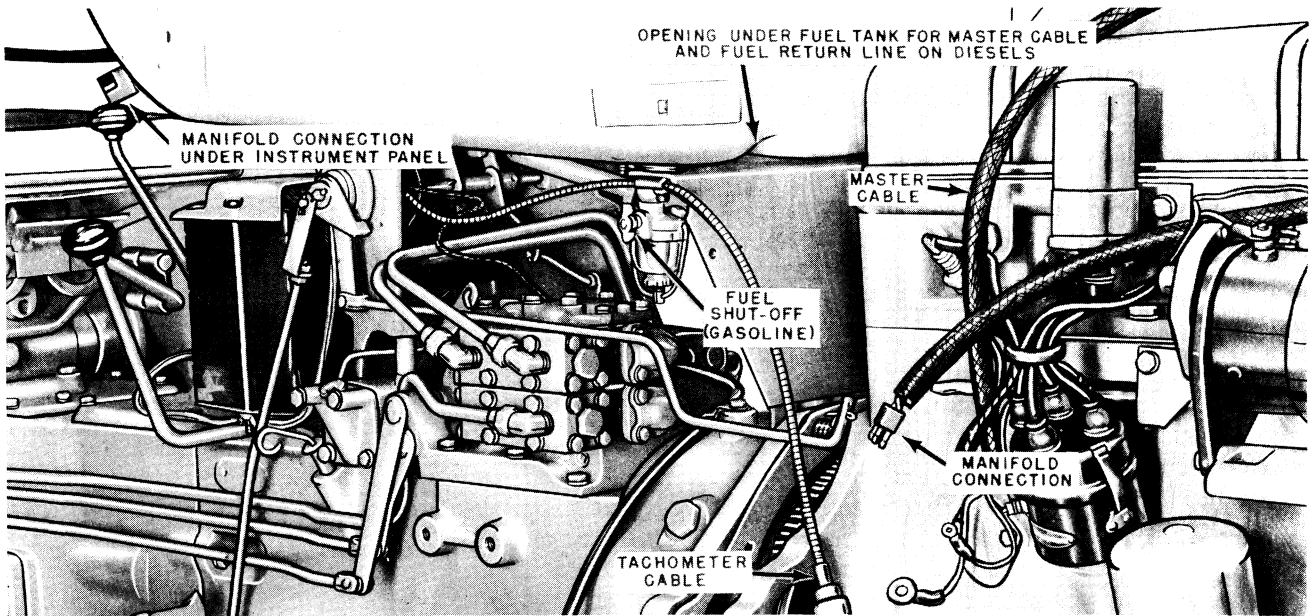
Conduit and Master Cable Removed from Under Fuel Tank
